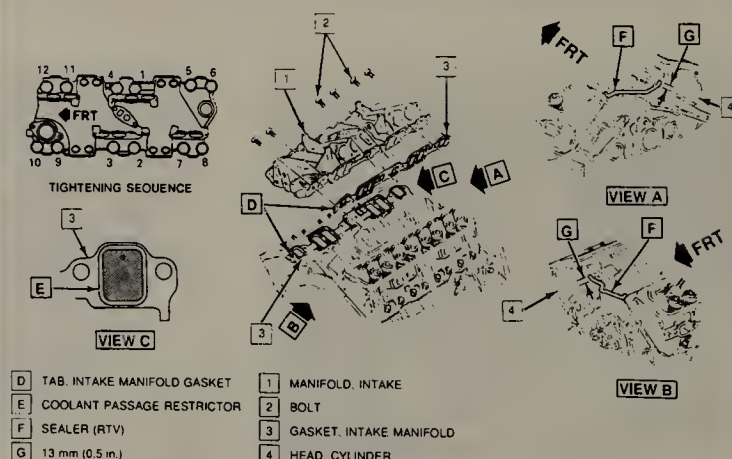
Exploded view of the intake manifold and bolt tightening sequence—1985-88 vehicles
